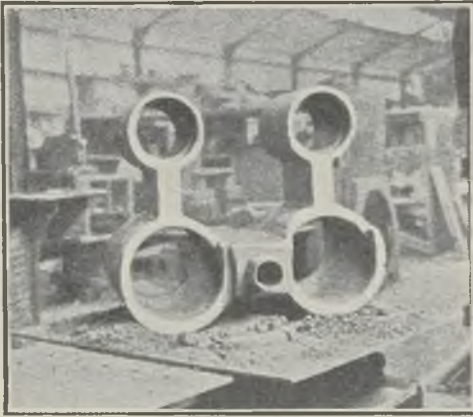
TWIN STEAM-JACKETED HYDRAULIC BRAKE CYLINDER CORE.
